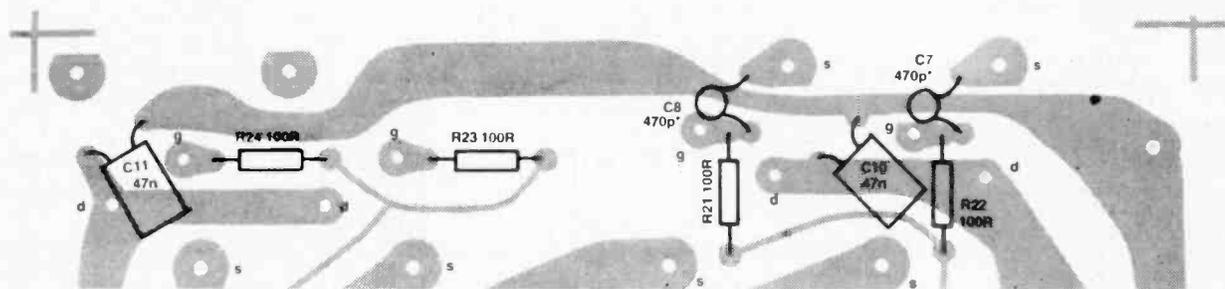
This overlay shows the components which are mounted directly on the copper side of the PCB.
